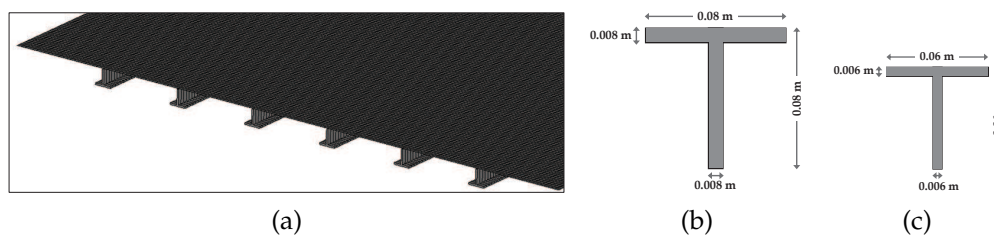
(a) Zoom view of the floor in the shipbuilding structure of Fig. 6.10. (b) Section of the floor ribs. (c) Section of the wall ribs.
